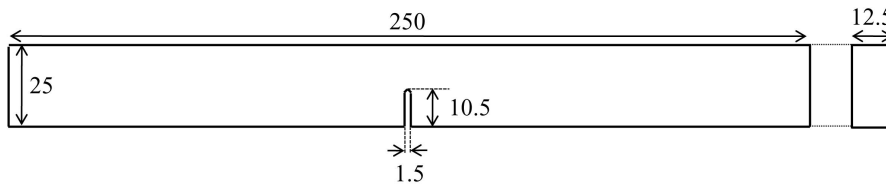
Schematic illustration of SE(T) test specimen (dimensions in mm).
